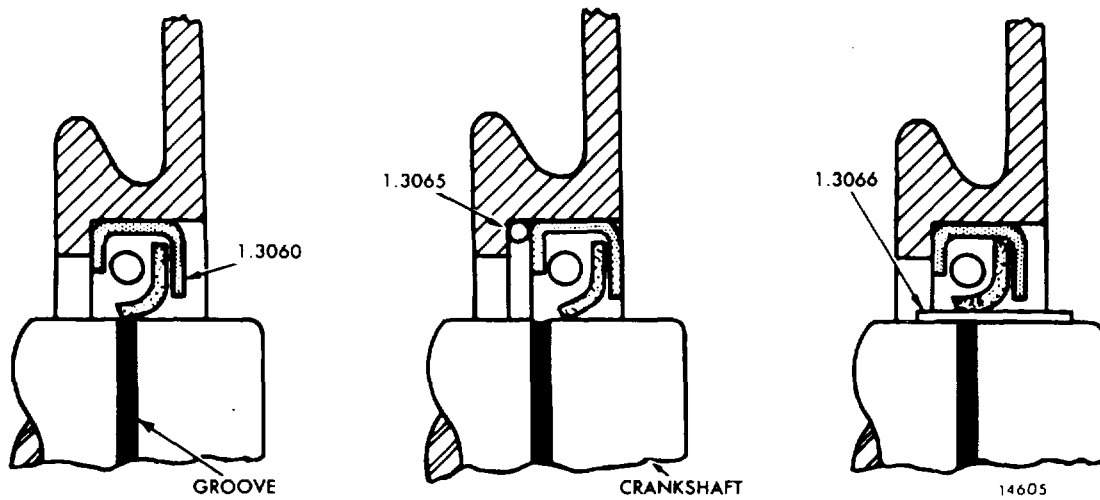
E. CRANKSHAFT REAR OIL SEAL
